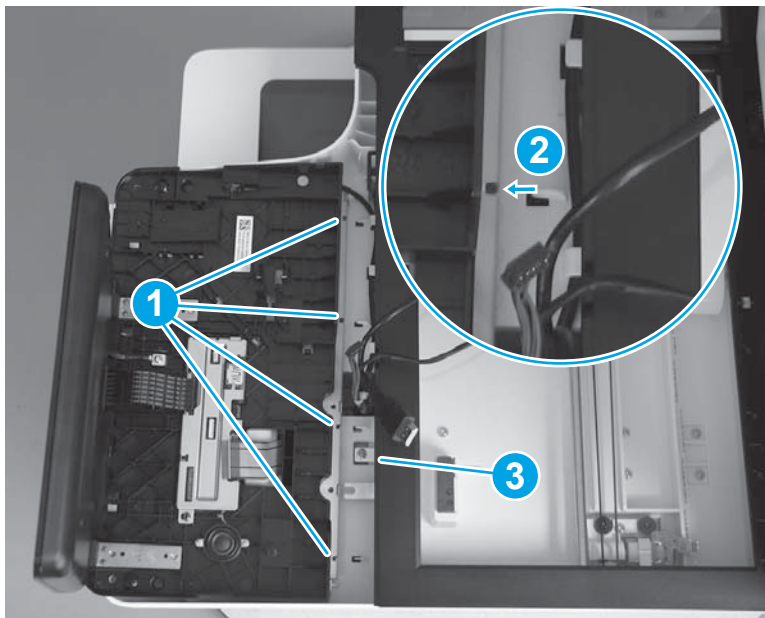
Check the keyboard flat cable (M527c/z)
